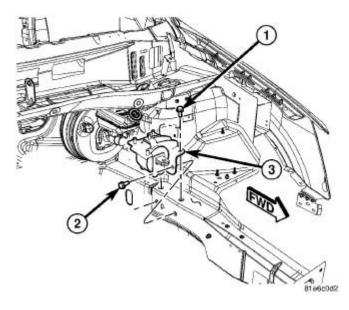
Left Engine Mount Courtesy of CHRYSLER LLC
